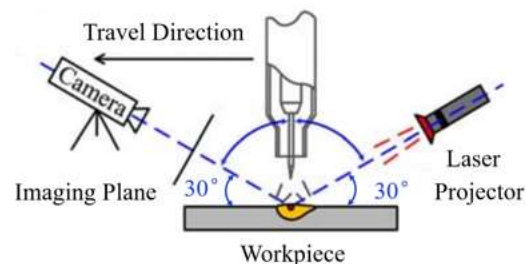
Imaging of laser reflected from weld pool surface [119].
